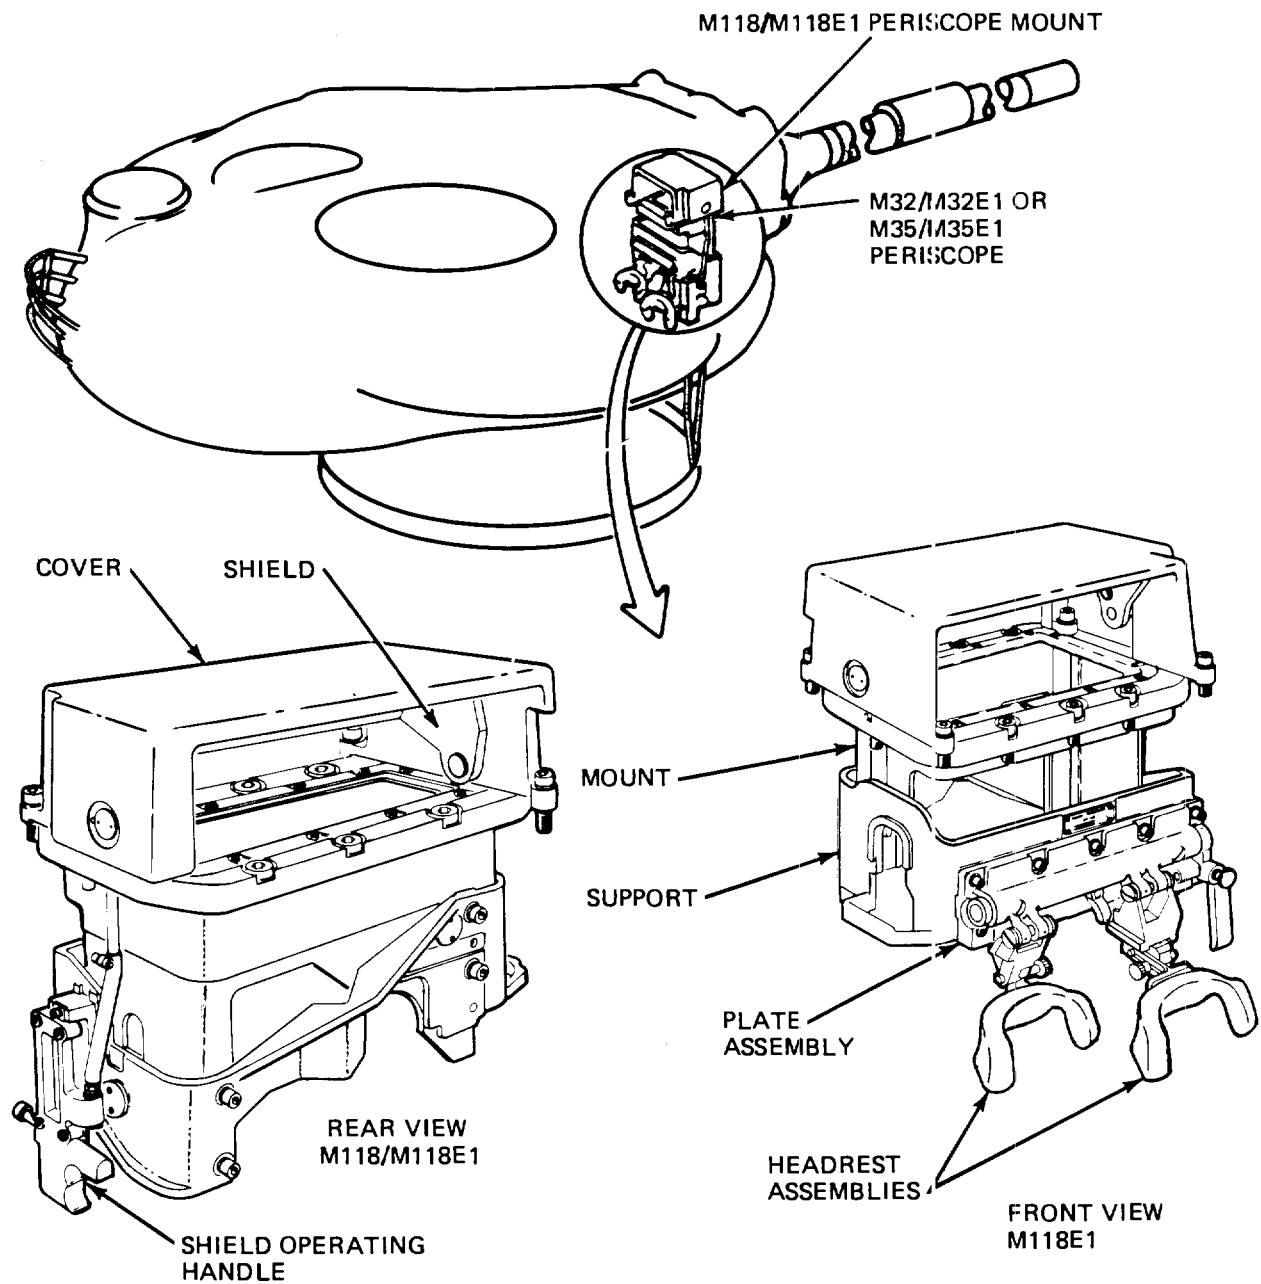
PLATE ASSEMBLY. The plate assembly is used as a support and clamping mechanism for the periscope installed in the mount.
